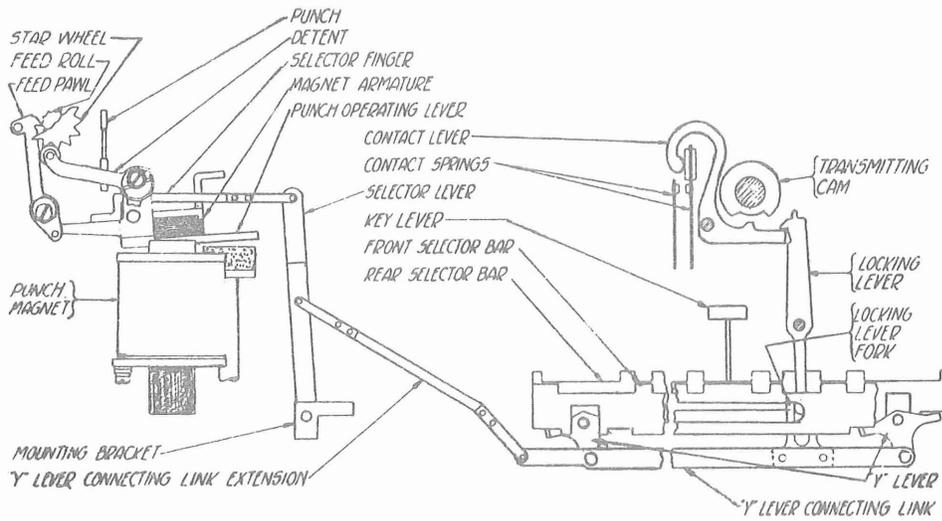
B - Perforator Operating Mechanism of the 15-Type Perforator-Transmitter
